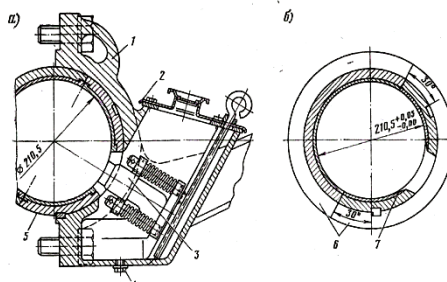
is a Motor-axial bearing (a) and the insert (6) of the motor TE 006:1 – bearing cap; 2 – the cover of oil chamber; 3 – wick holder of polyster; 4 – discharge bung; 5 – liner; 6 – the top and bottom halves of the steel bushing; 7 – Babbitt pouring.
